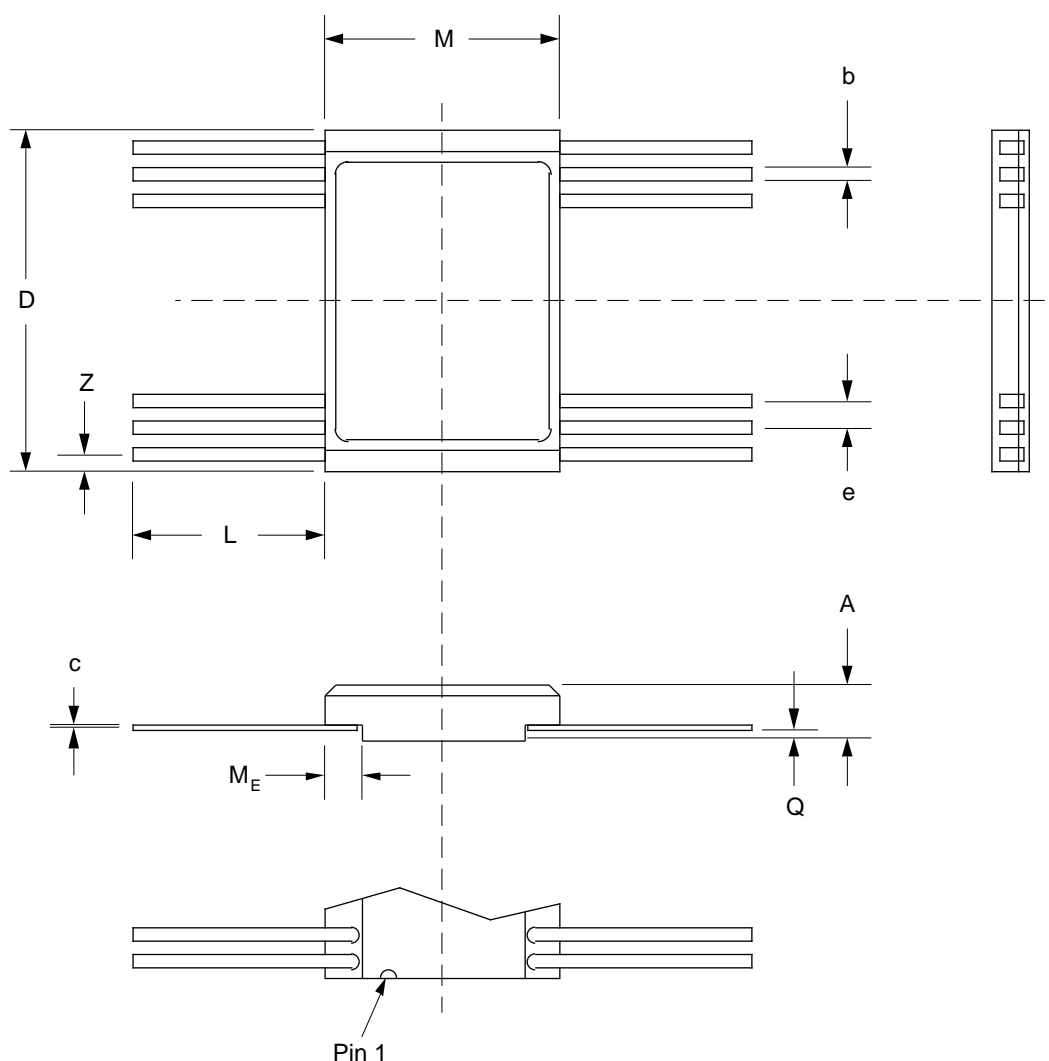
28-Lead Ceramic Flatpack (Solder Seal) - Package Style F
